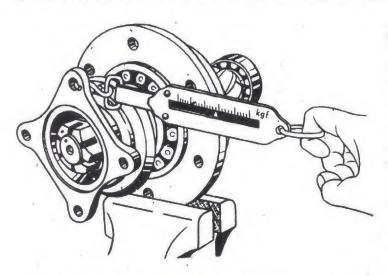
CHECKING OF AXLE DRIVE PINION. BEARINGS FOR TIGHT ENING
